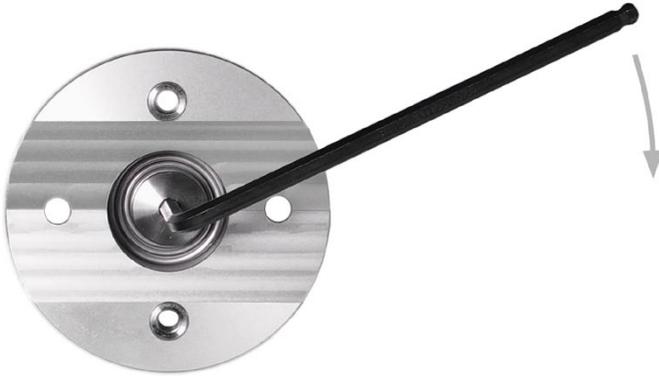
bottom of SR30 levelling mount. Preferred (un)locking with 4 mm hex key
